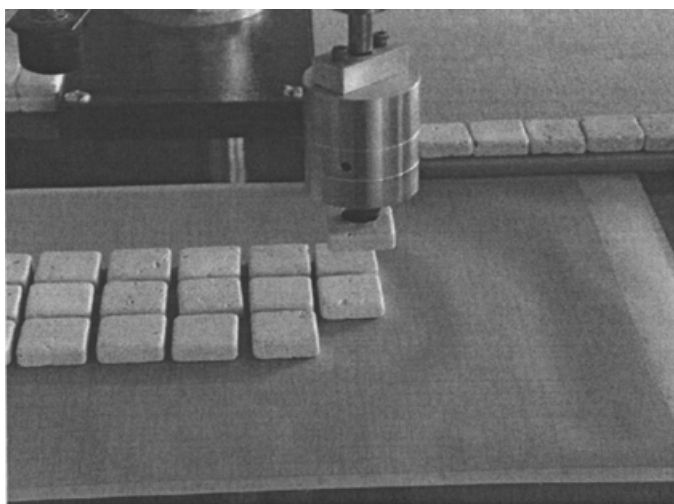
Mosaics using pieces of marble of the sizes of  $30 \times 30$  mm.
